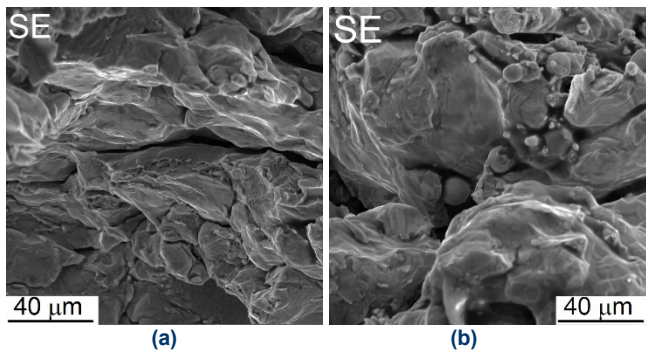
Details of fracture surfaces in the DIHPB tested samples prepared with 100%AC: (a) Ti64BEPM, (b) Ti64PA. SEM.
